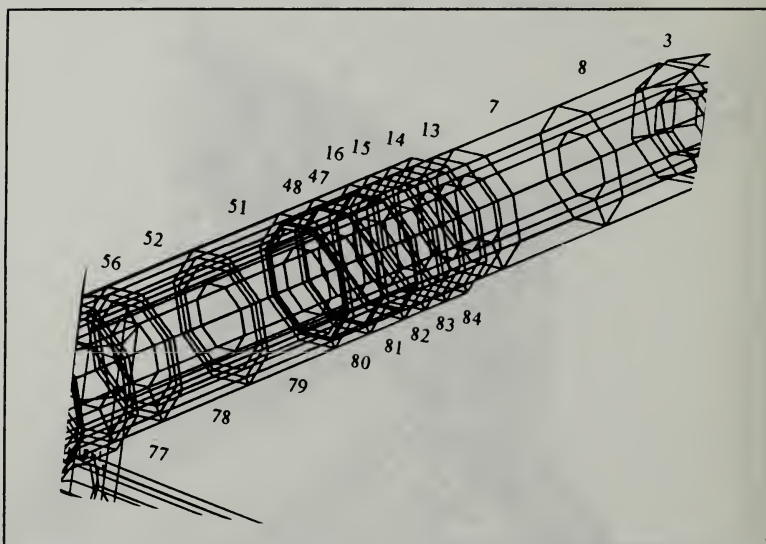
Attachment Point of Left Gear Leg and Aft Crosstube
